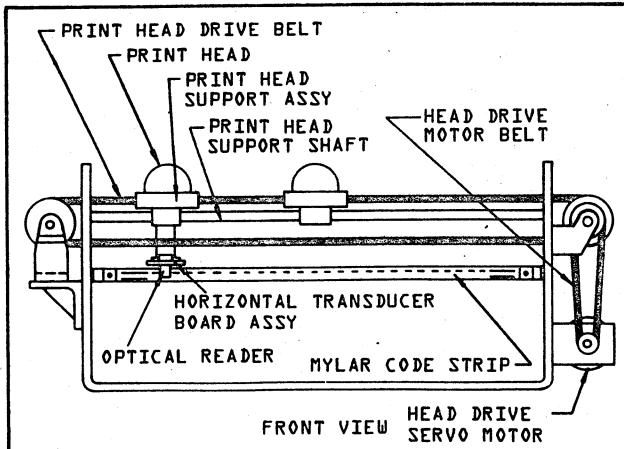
PRINT HEAD DRIVE AND MONITORING
